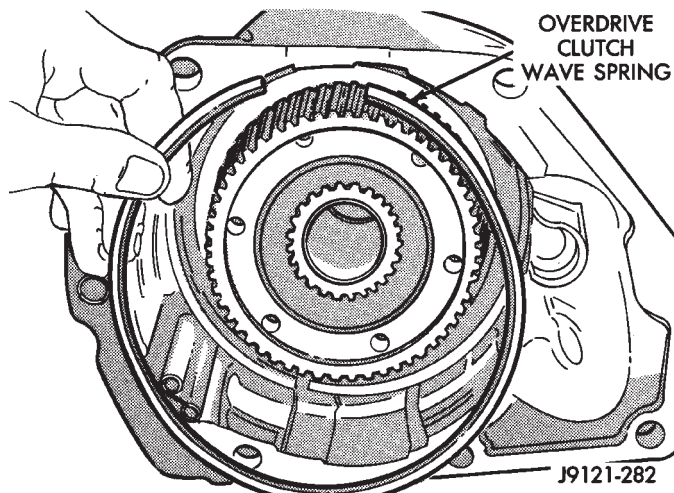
Removing/Installing Overdrive Clutch Wave Spring
